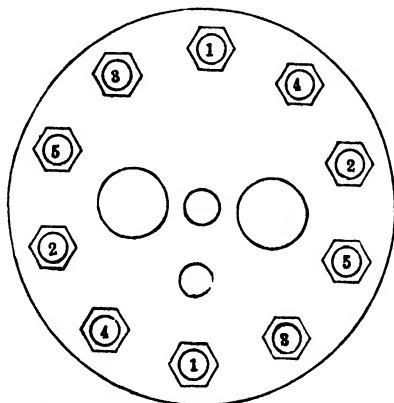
Method of drawing down cylinder-head bolt nuts.
